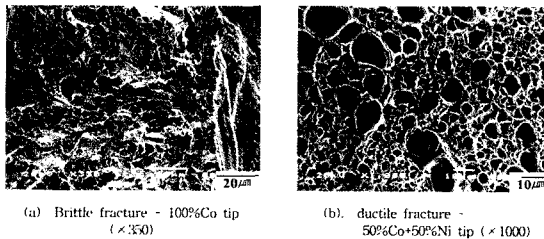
Typical Fracture surface of (a)100%Co weld, (b)50%Co+50%Ni weld
